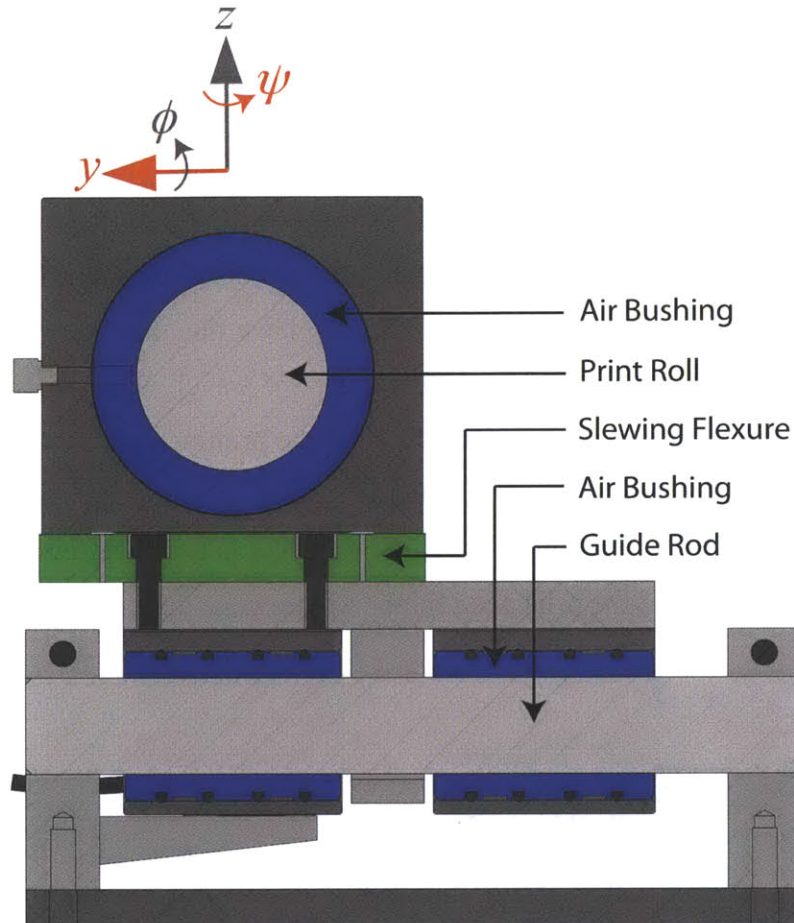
Slewing flexure design: The slewing flexure is sandwiched between the print head’s linear stage and the print roll pillow block. This flexure allows the relative rotation of these components, which enables one side of the print head to advance in front of the other in order to compensate for any taper in the stamp or misalignment in the machine.
